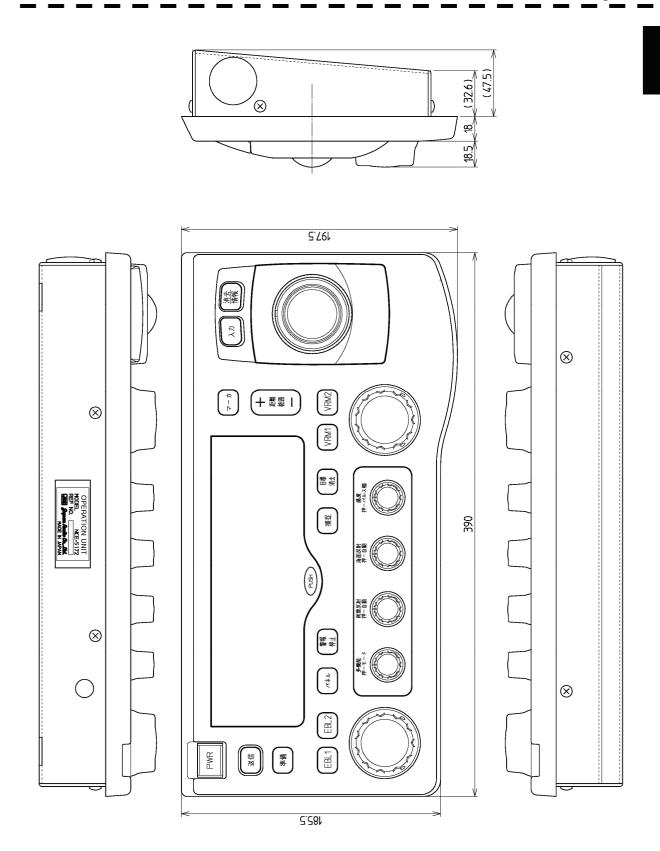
Outside Drawing of OPERATION UNIT, Type NCE-5172
